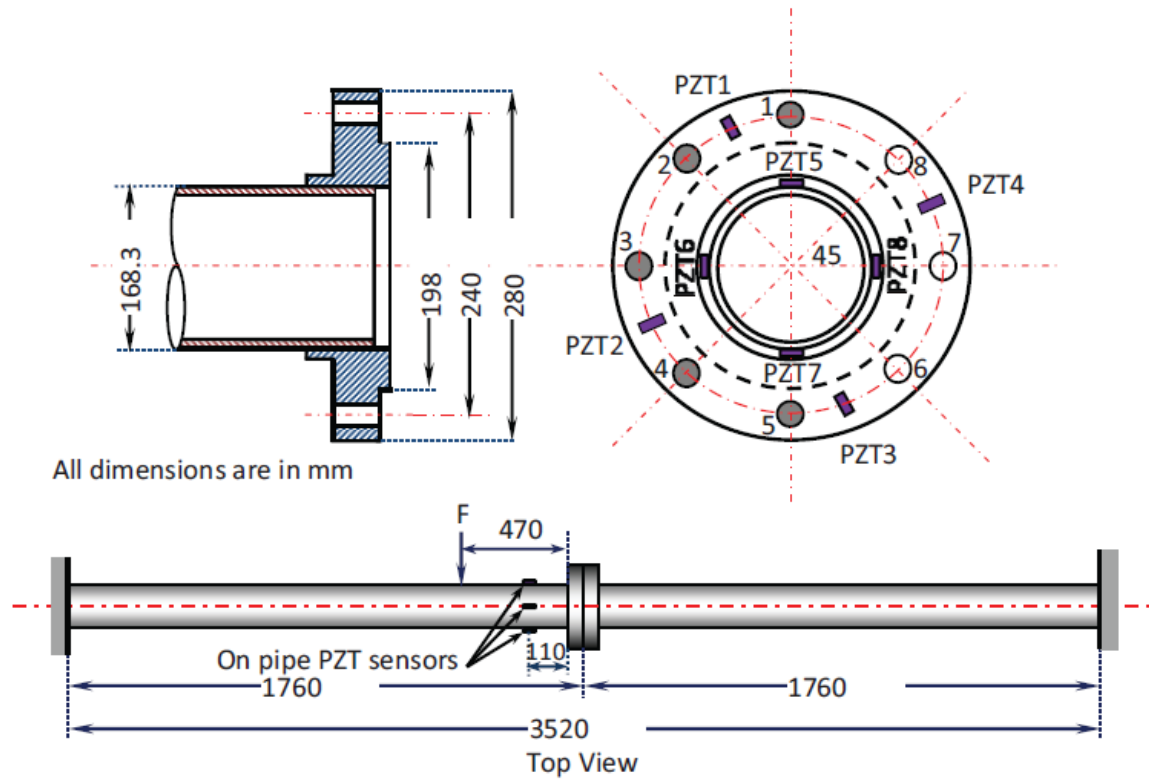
Schematic of the bolted joint showing dimensions and impact location.
